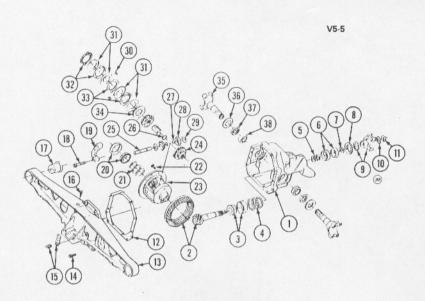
1963 - 1979 Corvette Rear Axle Carrier Assembly
